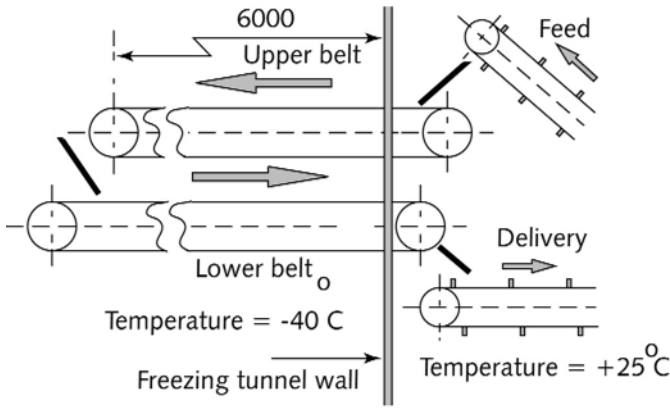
Schematic elevation through the freezing tunnel conveying system
